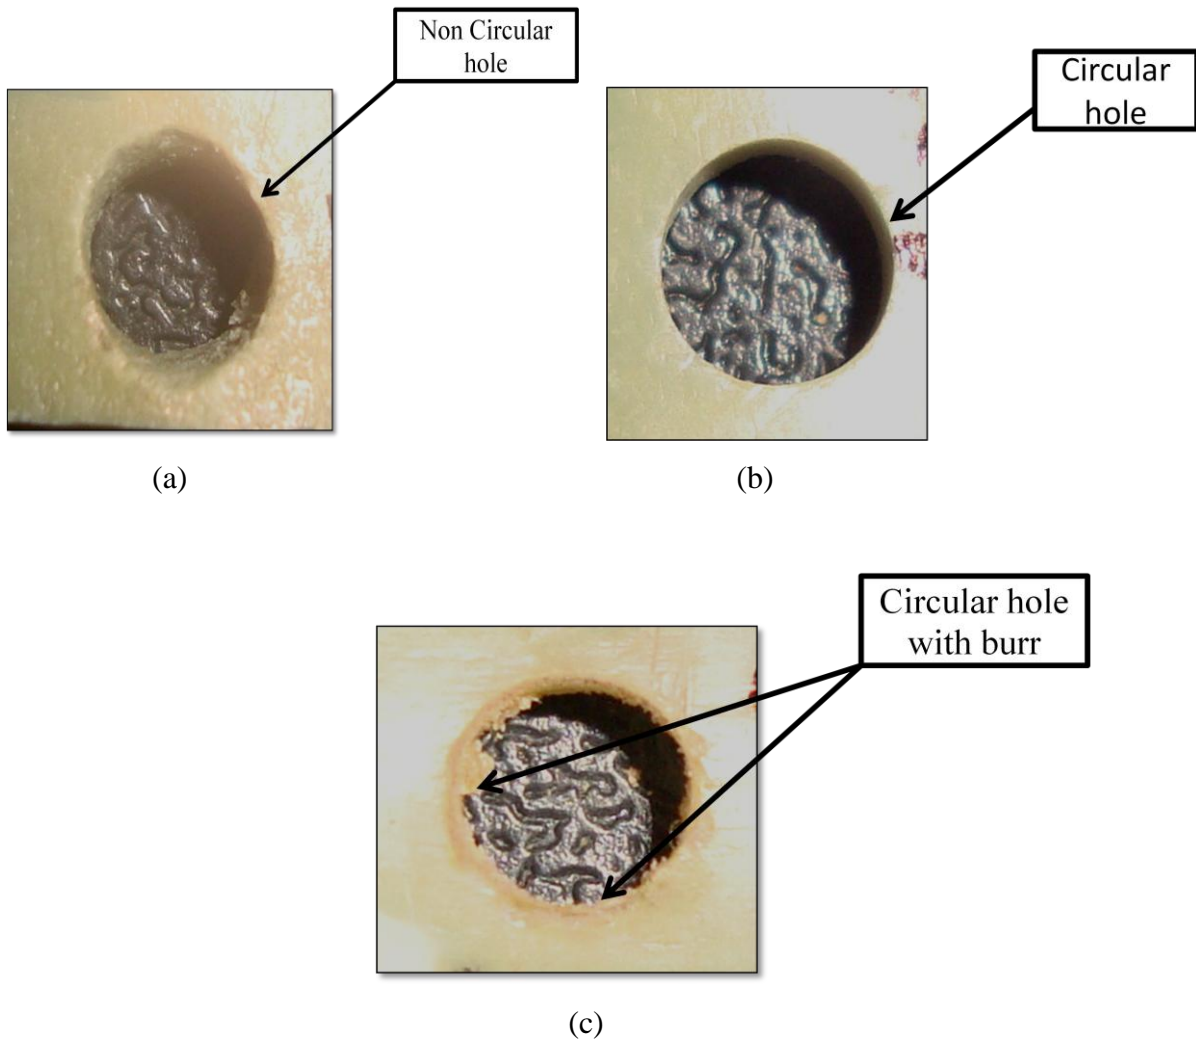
(a) Hole drilled by hollow tool (b) Hole drilled by twist drill (c) Hole drilled by Abrasive coated tool
